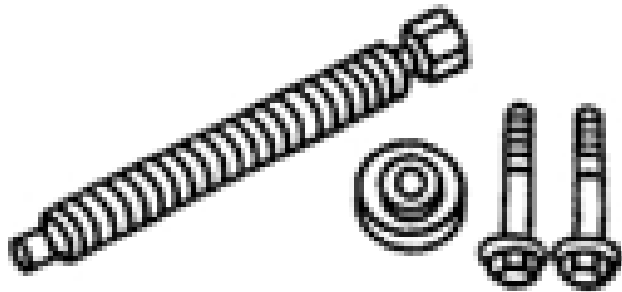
Locating Bolts And Accessory Drive Belt Splash Shield
